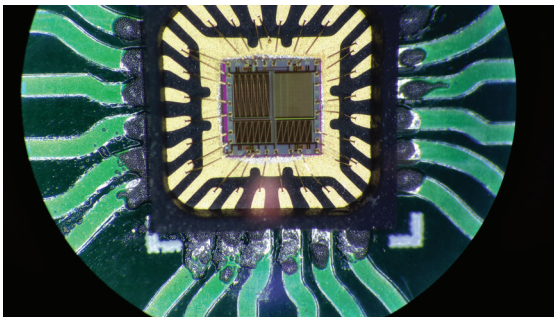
Die photograph, when mounted on a printed circuit board (PCB).
